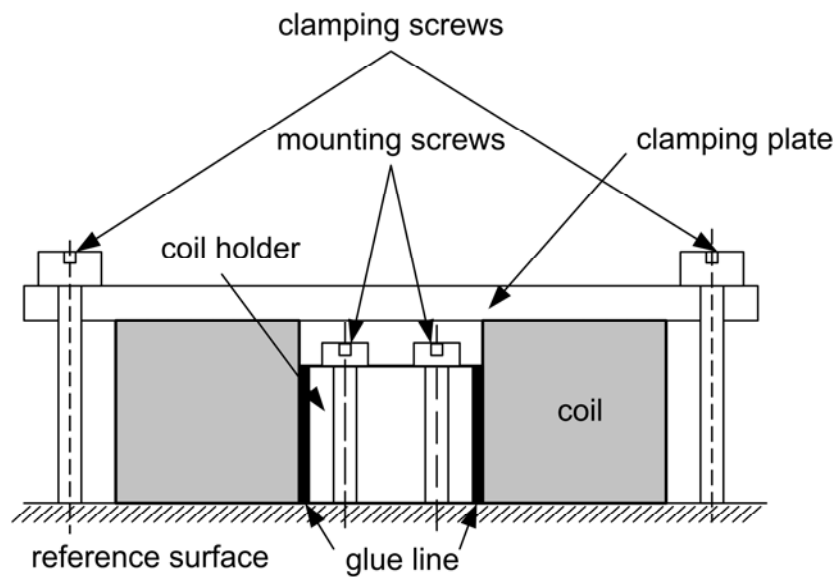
Fixture for gluing vertical coil with coil holder.
